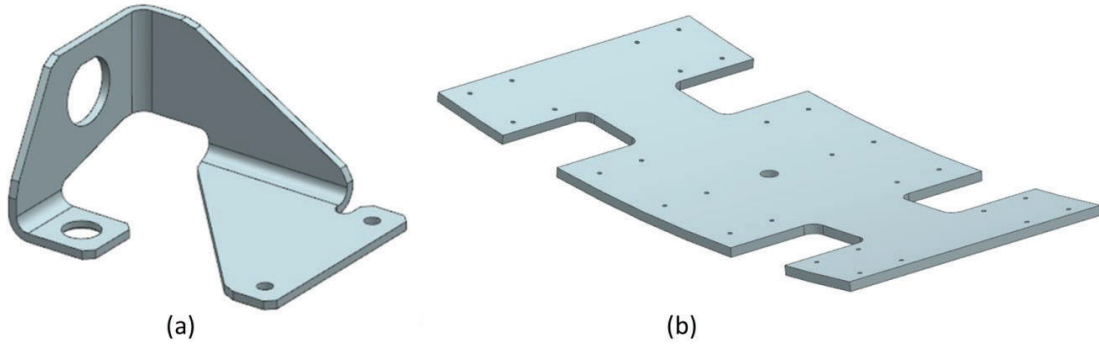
Sample Parts: (a) Sheet Metal, (b) Common Stock
